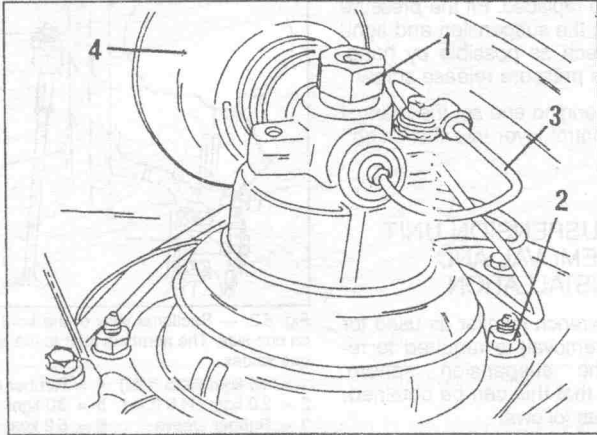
Details for the removal and installation of suspension cylinders.
